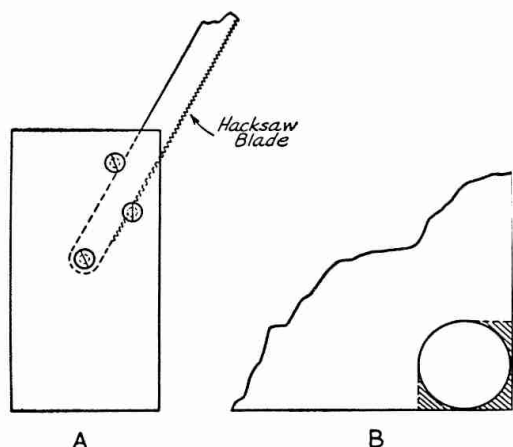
To cut rectangular holes in a chassis corner, holes may be filed out as shown in the shaded portion of B, making it possible to start the hack-saw blade along the cutting line. A shows how a single-ended handle may be constructed for a hack-saw blade.
